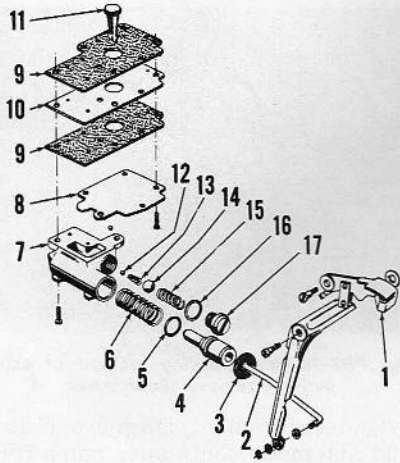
Exploded view of the manual chain oiler pump used on 700, 700-G, 750 and 850 models. Plug (11) is not used on later models.
